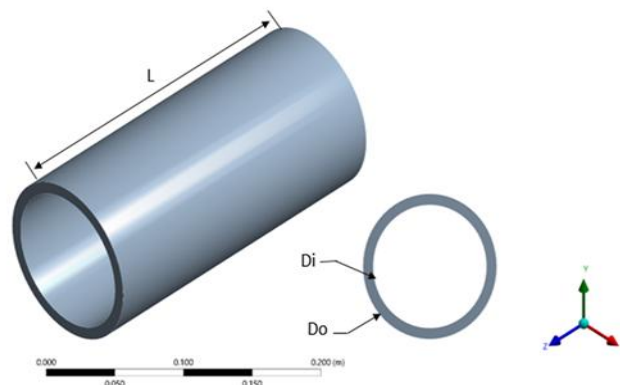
Front and ISO views of thick-walled cylindrical pipe specimen with dimensions.
